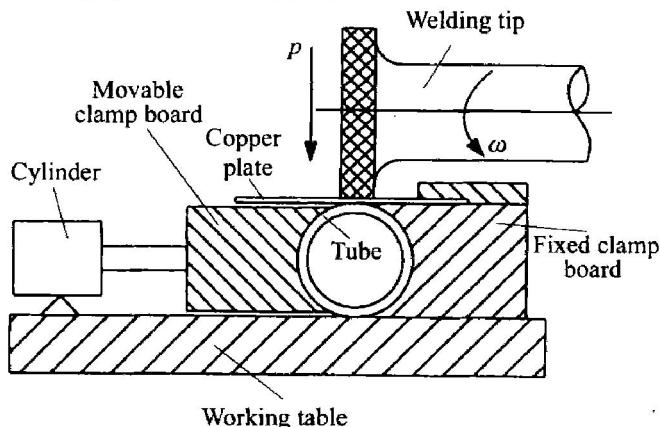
Sketch of ultrasonic seam welding equipment for copper plates and tubes
